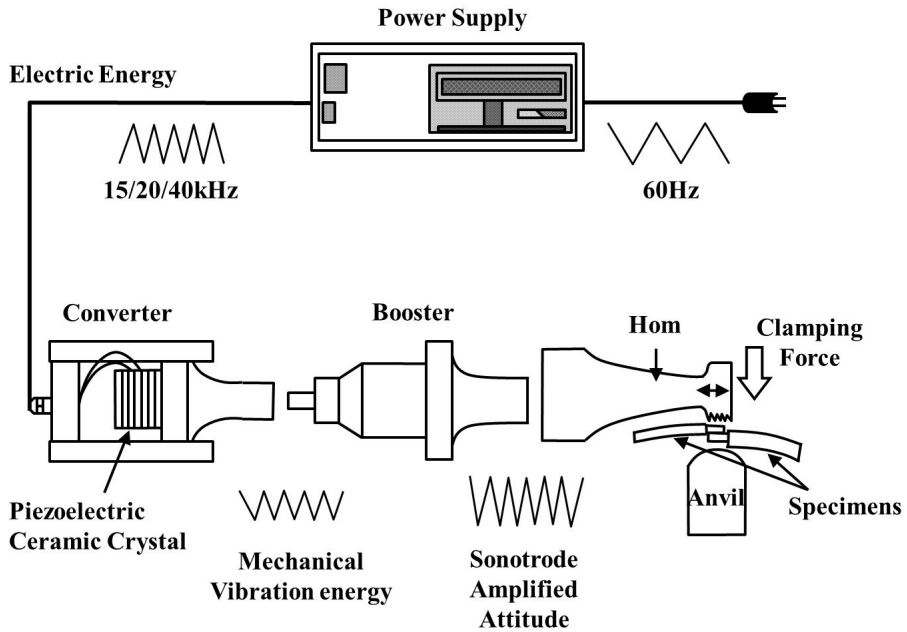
Schematic of ultrasonic welding equipment[72]
